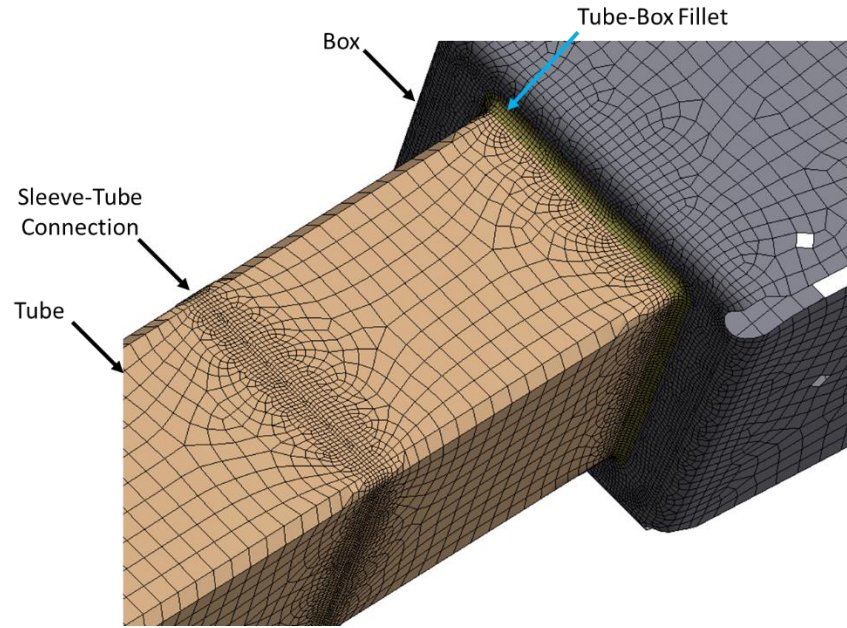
Smaller element sizing at fillet for tube-box and sleeve-tube (sleeve hidden).
